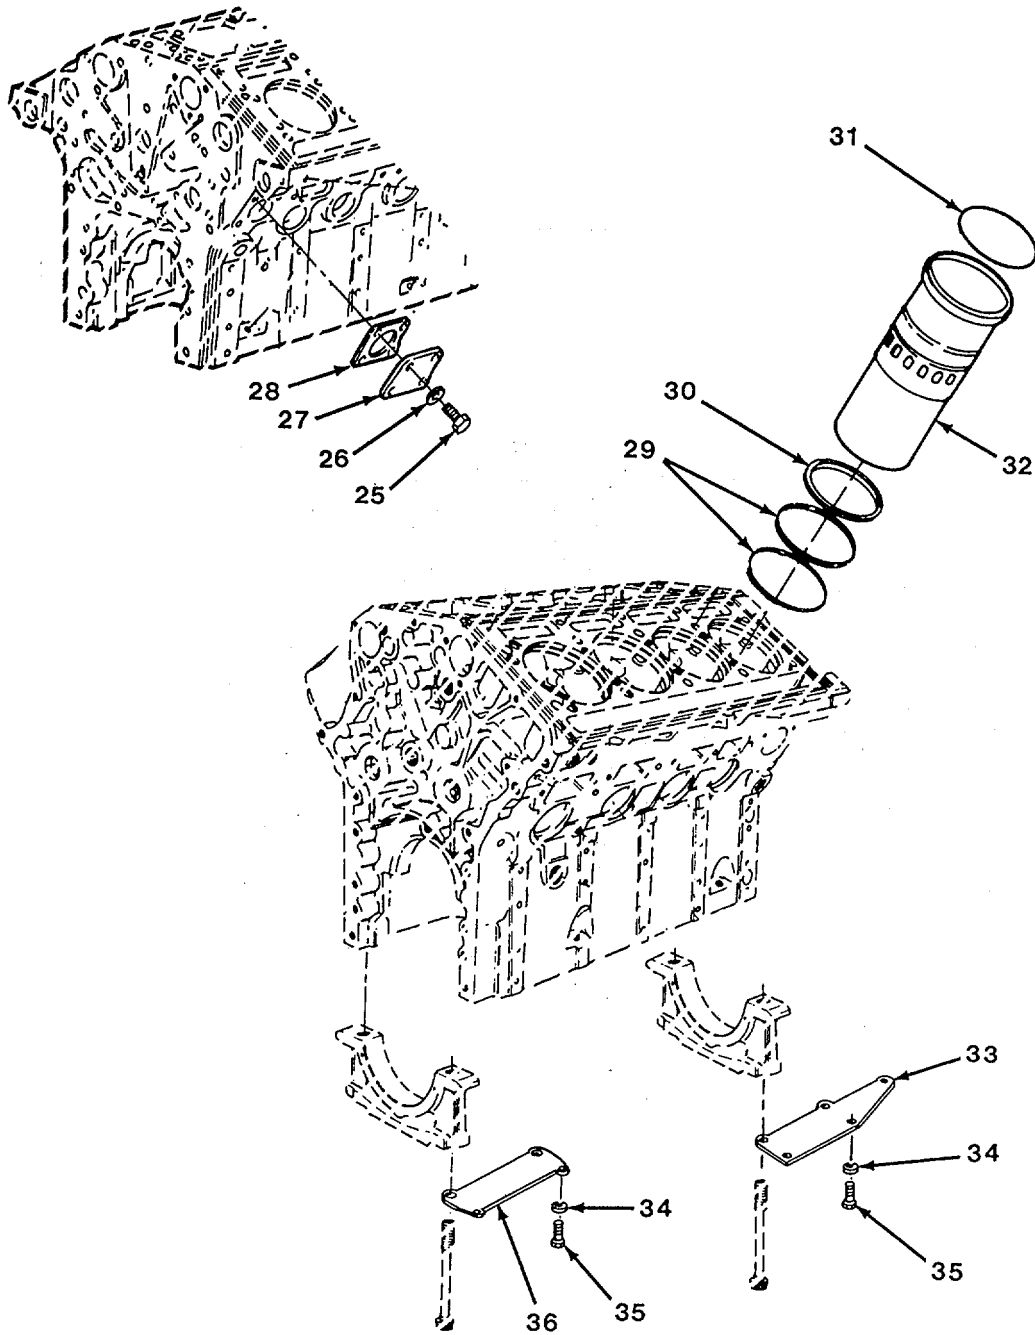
Cylinder Block Assembly, Sheet 3 of 3
